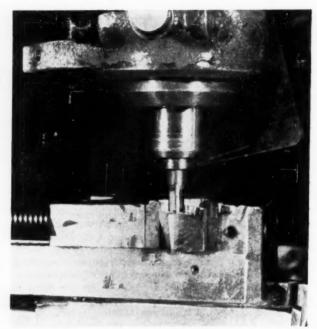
MILLING POCKET FOR CARBIDE TIP
